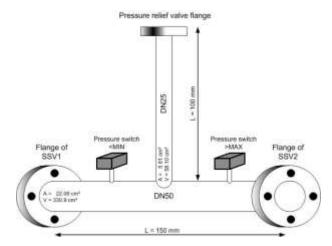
Pressure Switches between SSV1, SSV2 and Pressure Relief Valve
